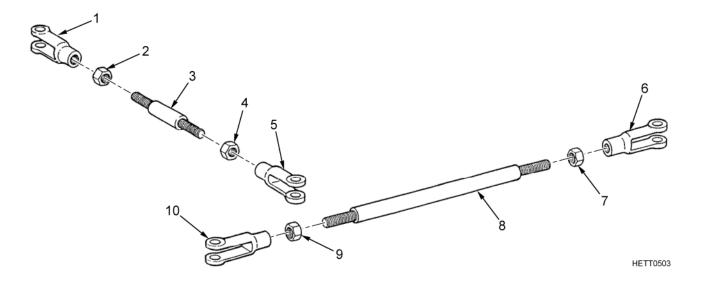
Gooseneck Isolation Valve Assembly Repair.
